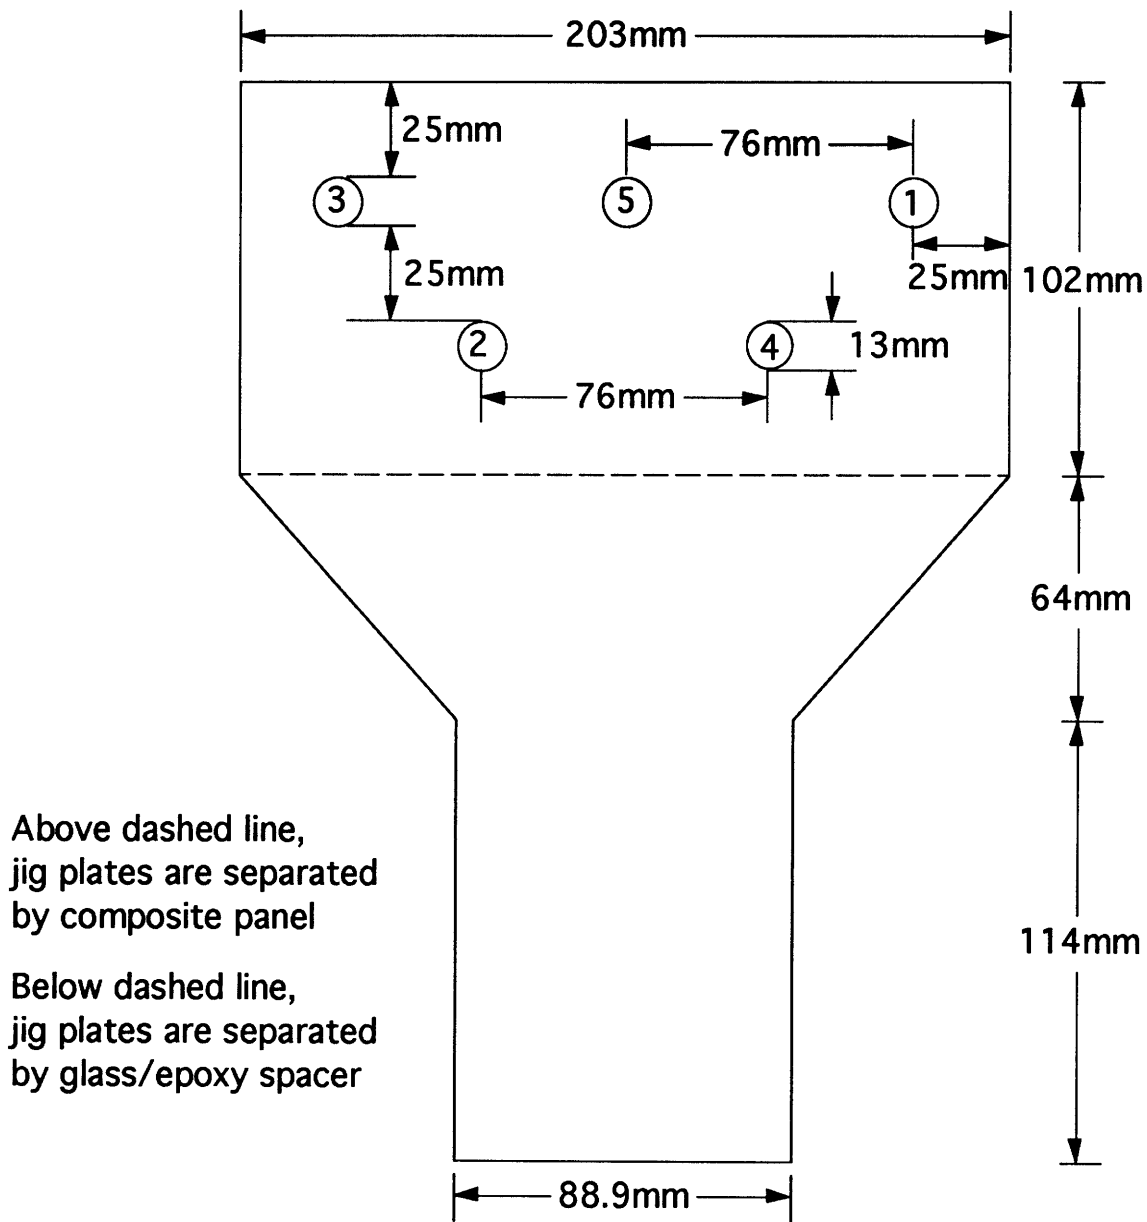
Jig Plate Dimensions and Bolt Tightening Sequence.
